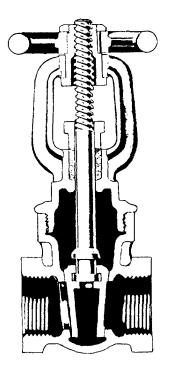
Cutaway view of a gate valve (rising-stem type).
